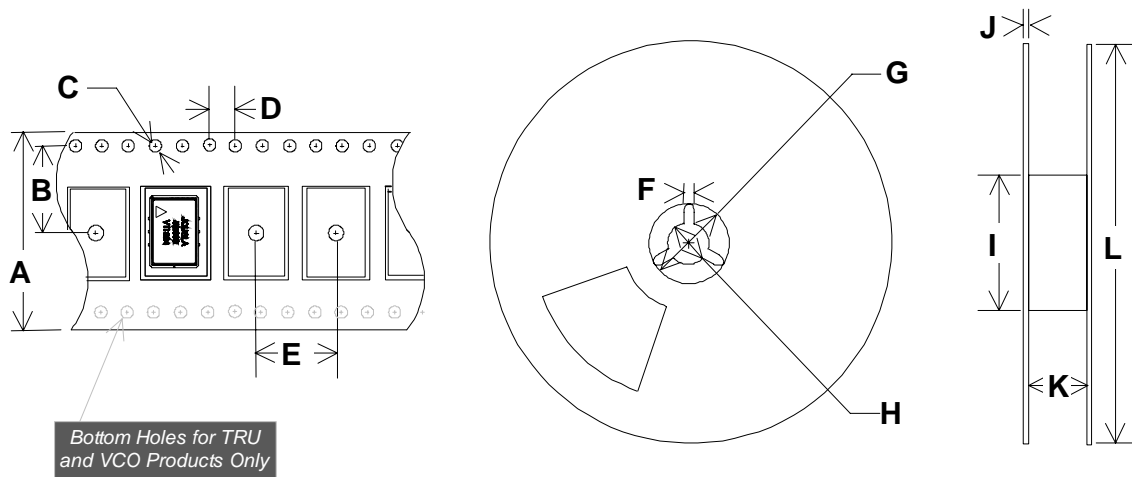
Tape Reel Drawing for CMOS and PECL output option
